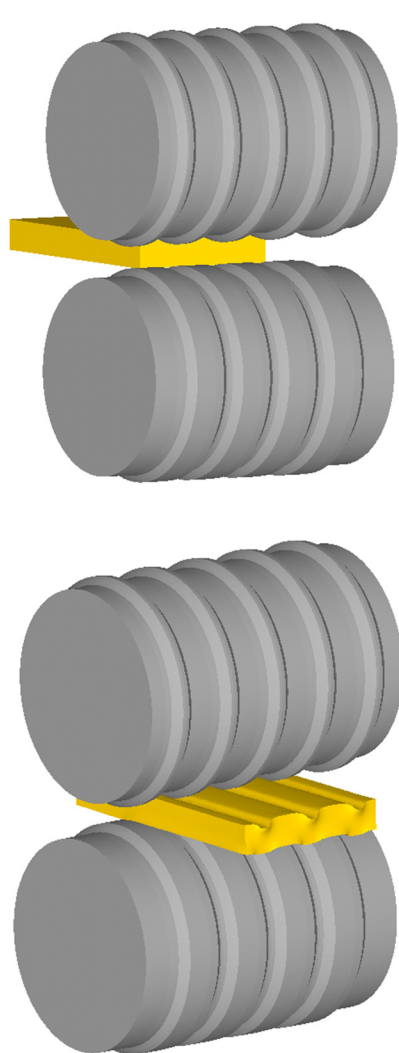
Model of rolling in relief rolls: (a) - filing of workpiece in the roll gap; (b) - process of rolling.
